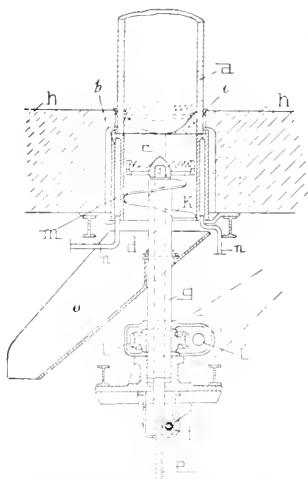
SCRAPER FOR KEEPING BOTTOM OF RETORT CLEAR.
